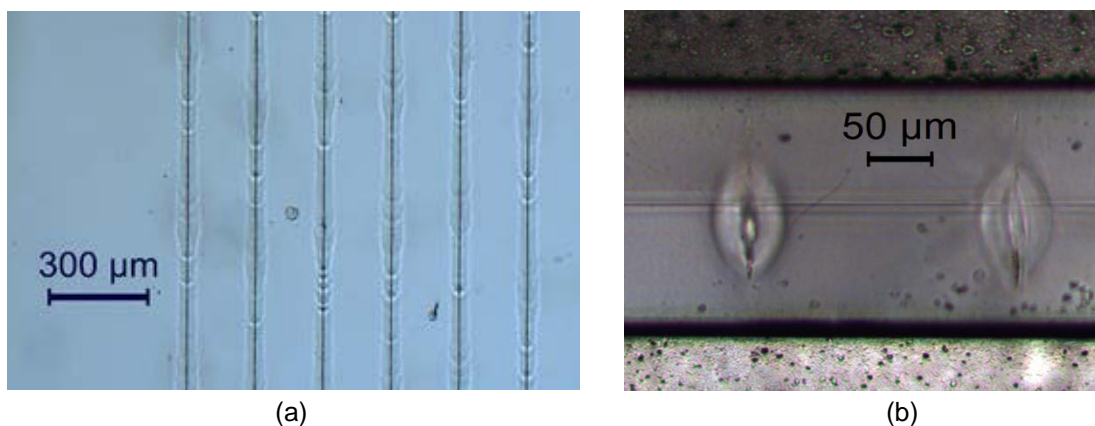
Optical microscope images of the weld features in two 100  $\mu\text{m}$  thick flexible glass components obtained by ultrafast laser microwelding (a) Top view of a series of welds; (b) cross section of the weld seam
